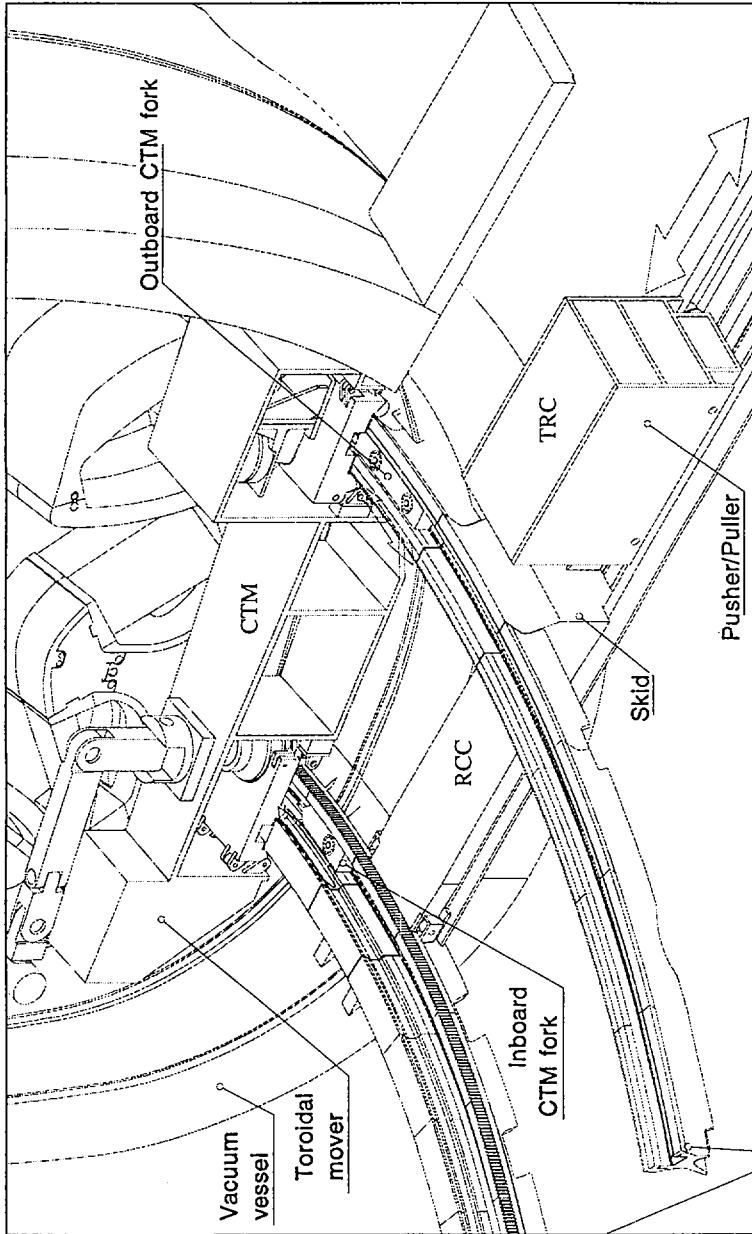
Three dimensional view of the CTM, RCC and TRC during in-vessel handling.
